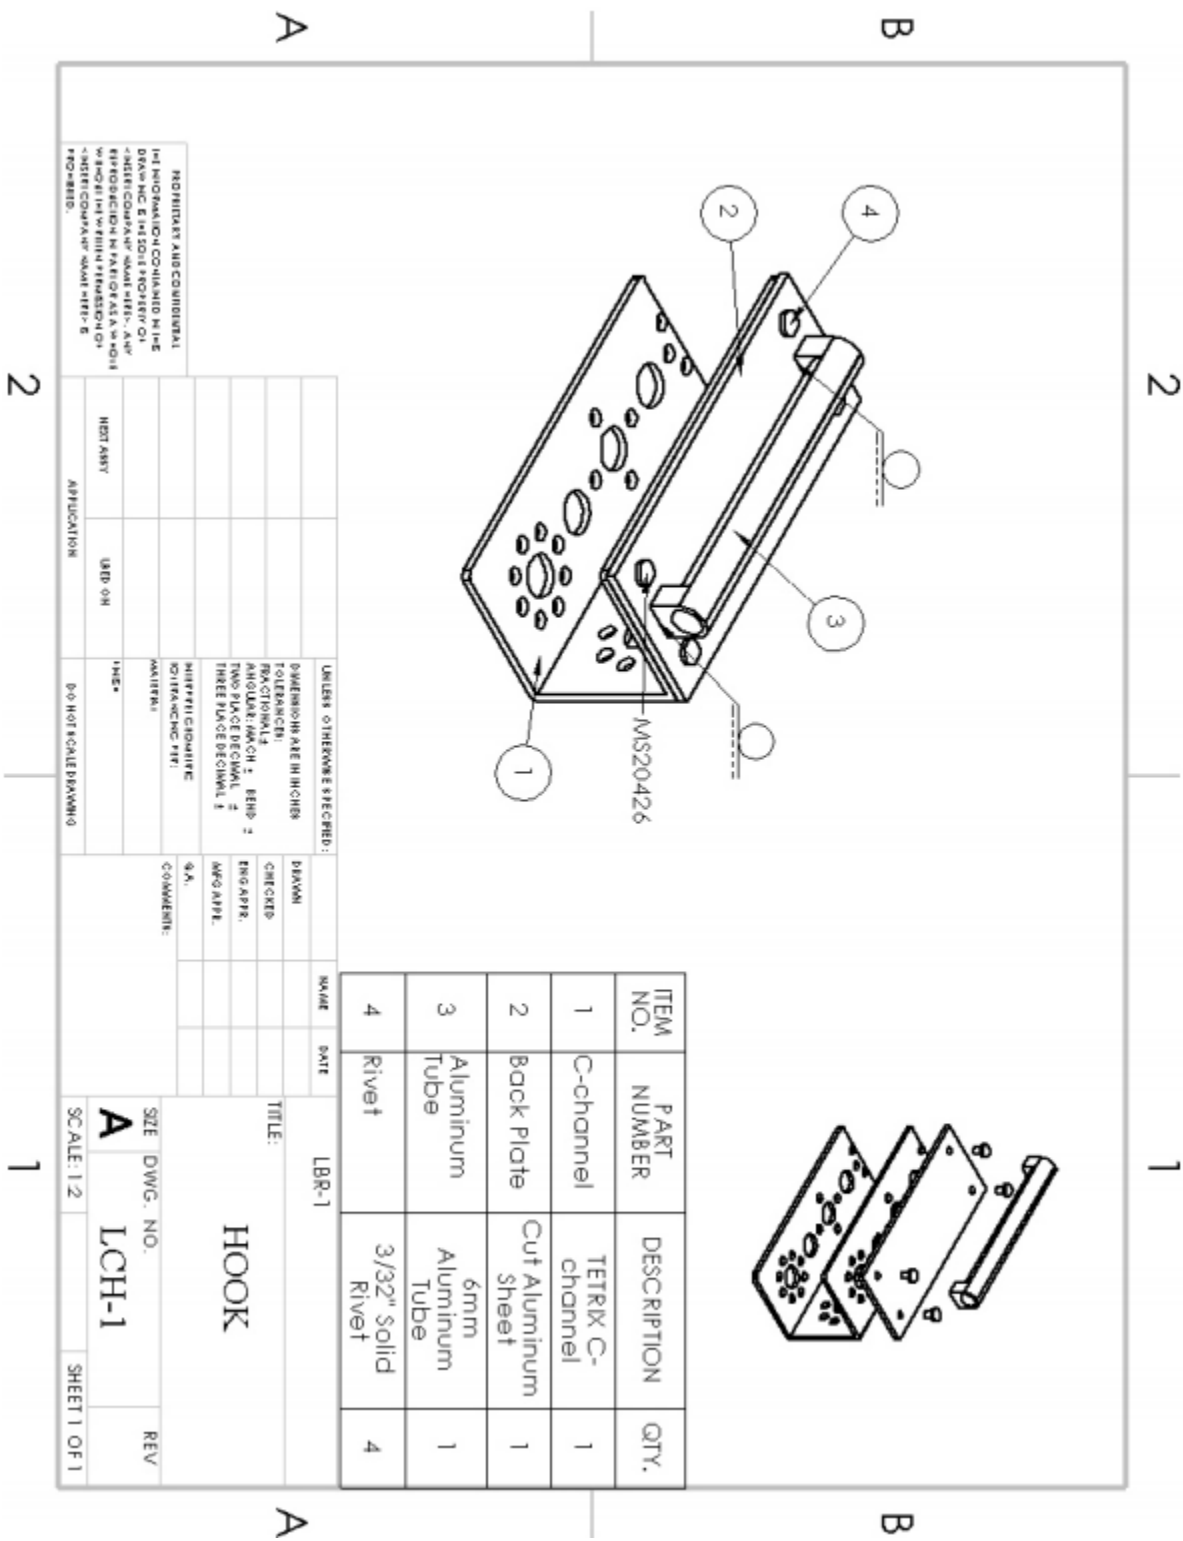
Assembly drawing of the lifting and climbing hook.
